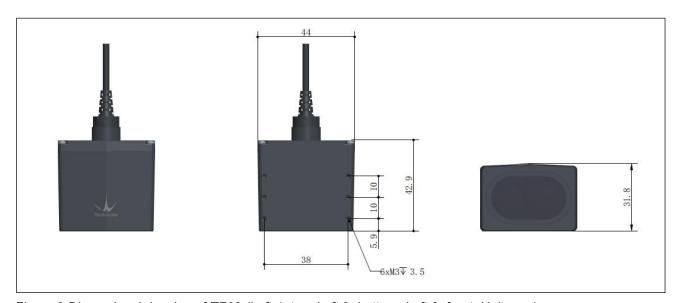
Dimensional drawing of TF03 (Left 1: top; Left 2: bottom; Left 3: front; Unit: mm)
